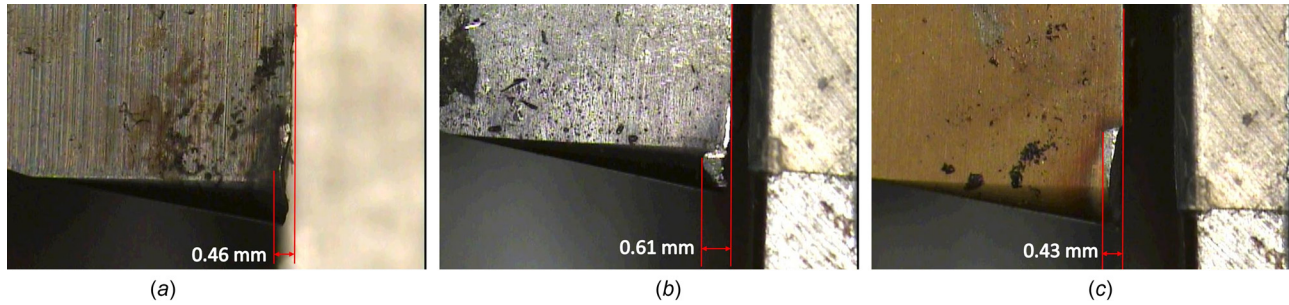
Tool flank wear in dry cutting: (a) flank wear—flat insert, (b) flank wear—grooved insert 1, and (c): flank wear—grooved insert 2
